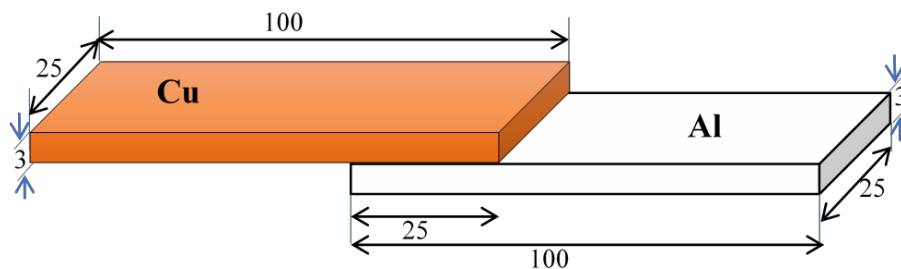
Dimensions of the overlap specimen that to be welded in mm
